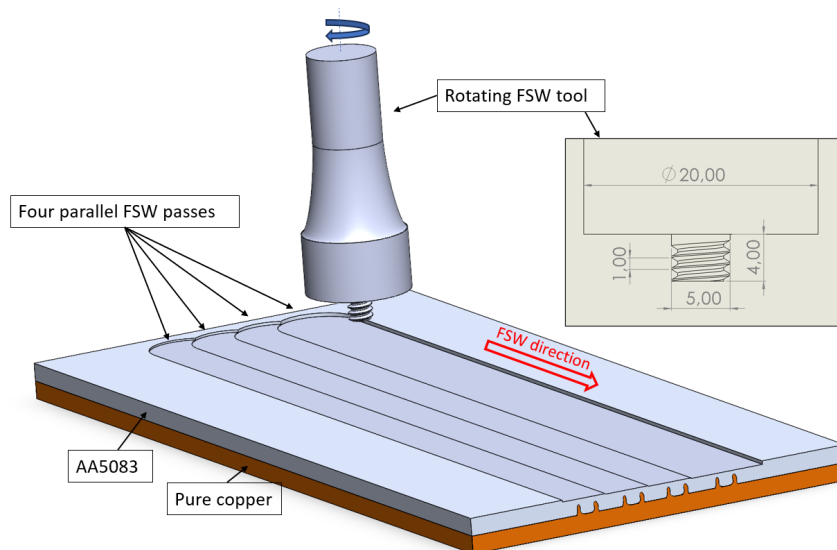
Schematic illustration of the friction stir welding (FSW) process used to fabricate the Al–Cu bimetallic sheet, showing the rotating tool and the four parallel passes employed to produce a large-area bonded interface. The tool geometry and main dimensions are also indicated (shoulder diameter: 20 mm, pin diameter: 5 mm, pin height: 4 mm, thread pitch: 1 mm).
